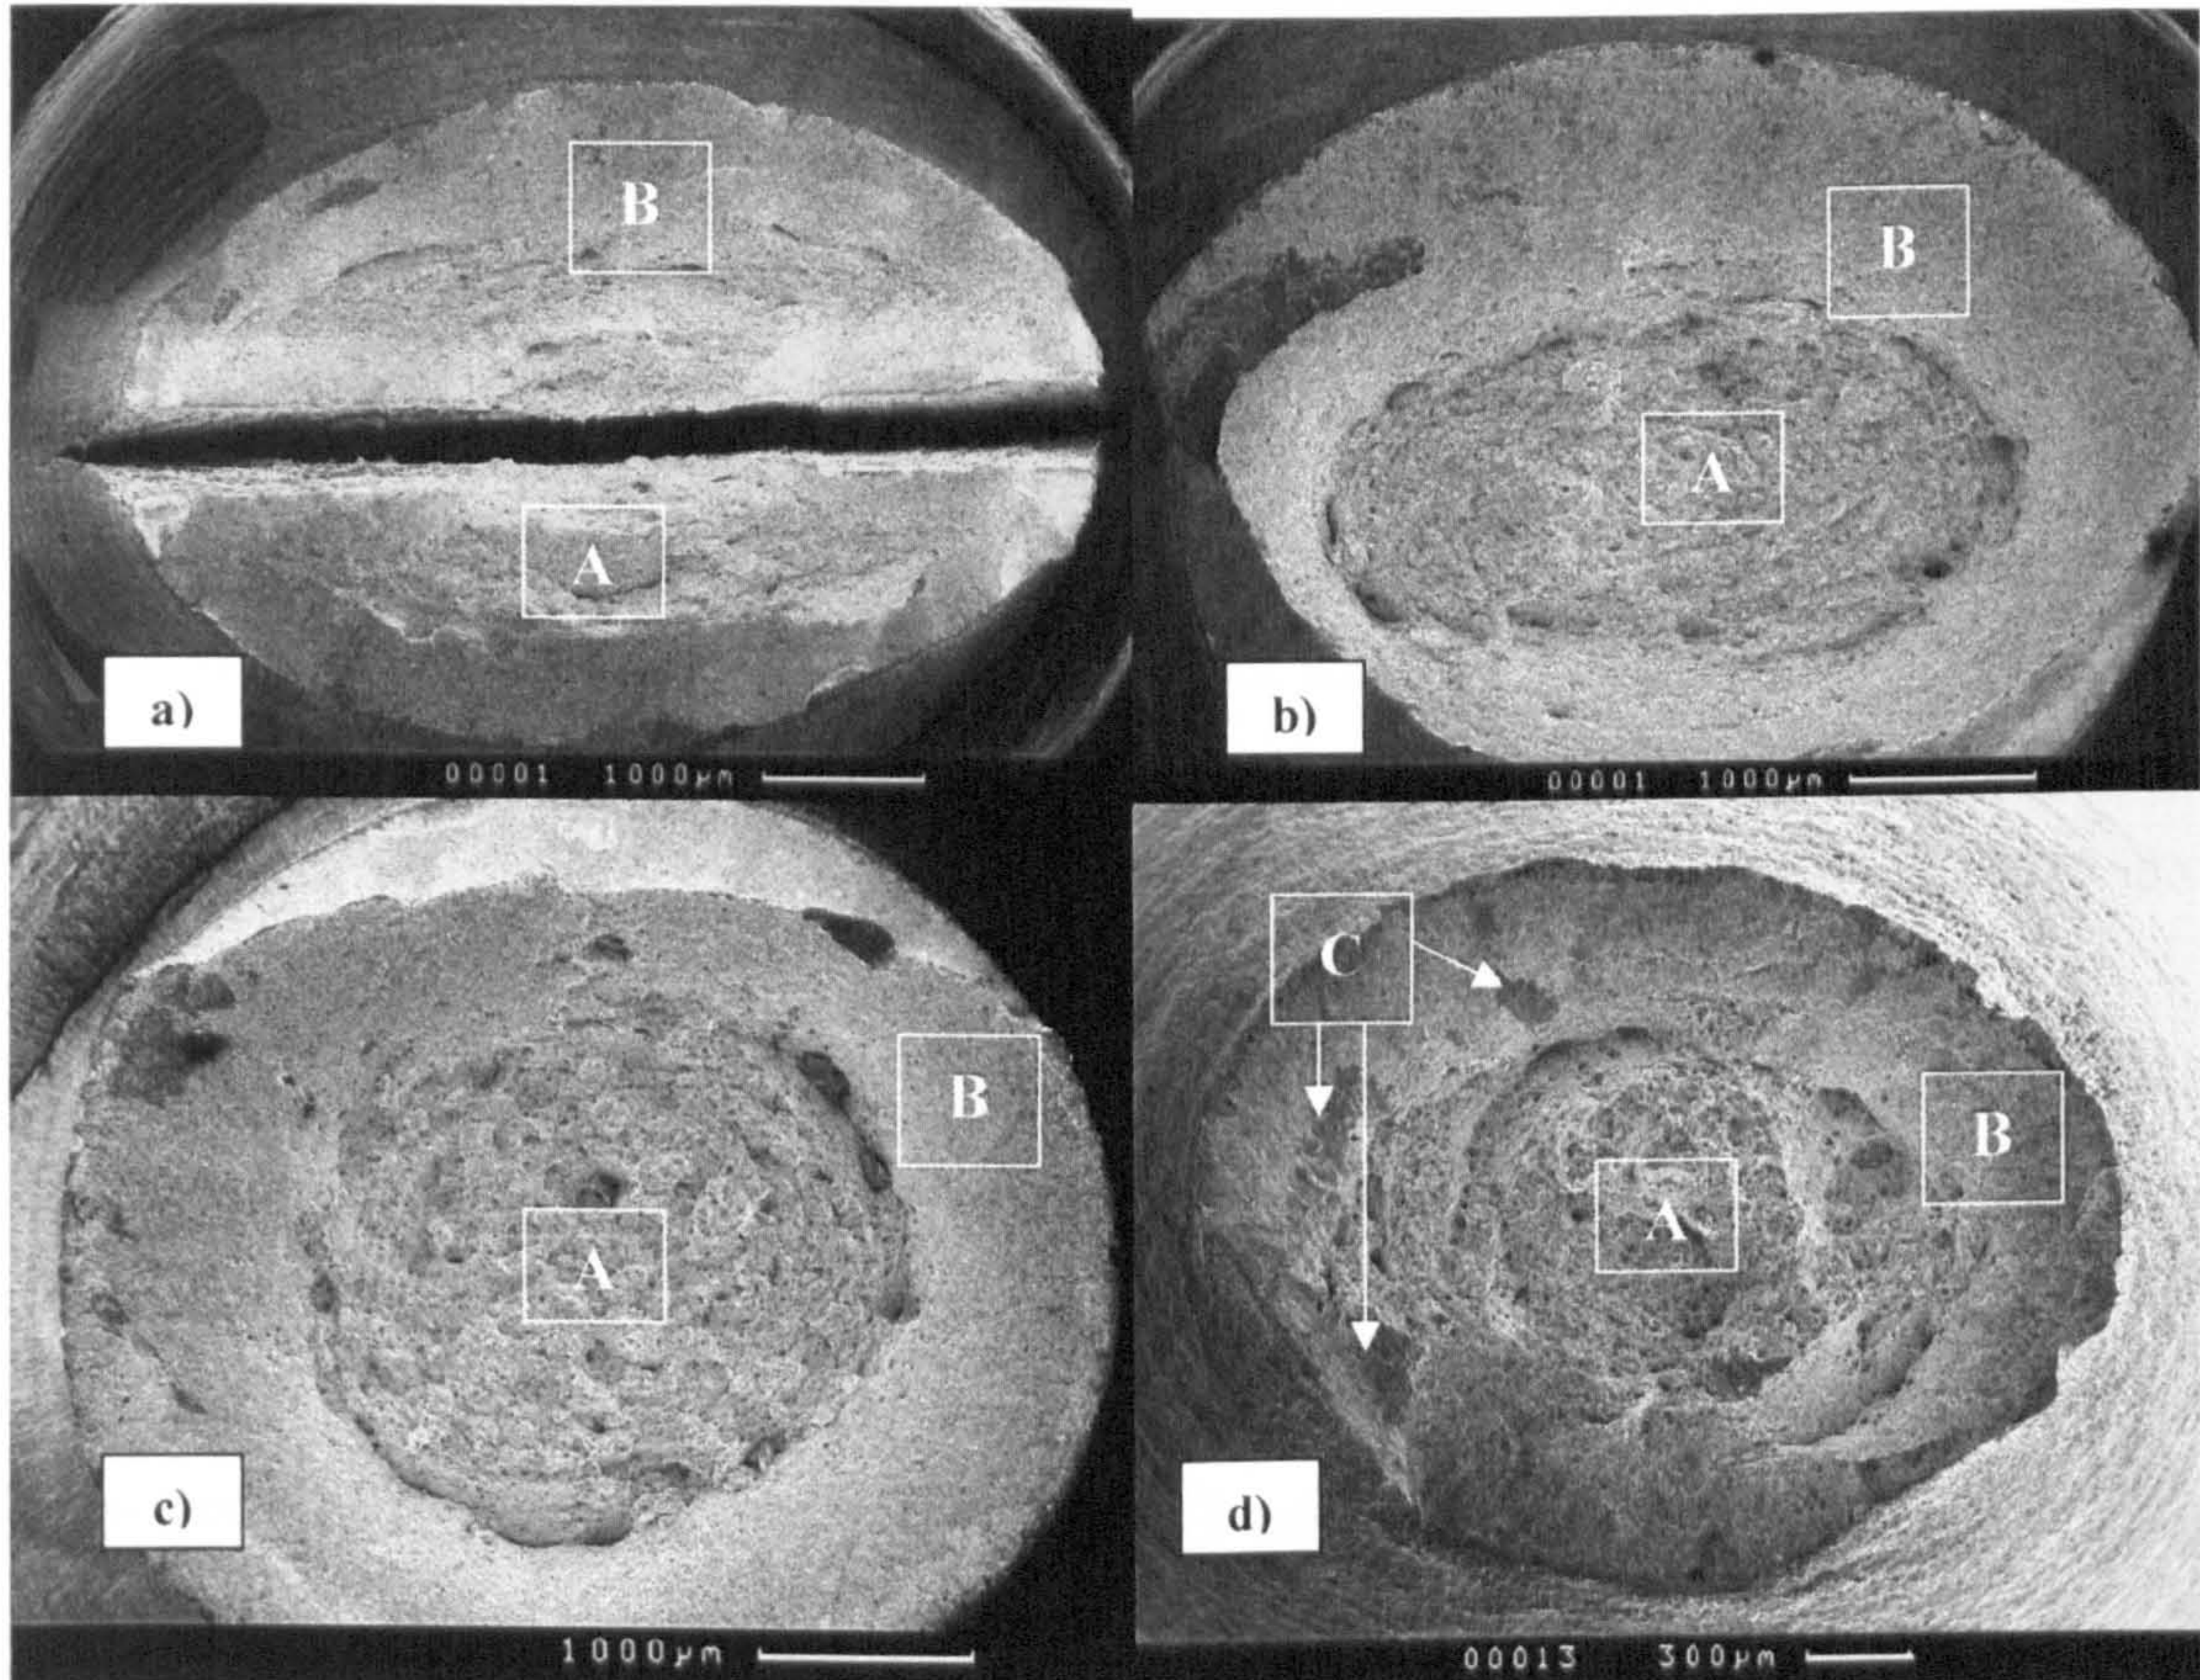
Macroscopic fracture surfaces of tensile specimens in: a) L direction (S-T fracture plane), b) T direction (S-L fracture plane), c) 45 direction (S-LT fracture plane) and d) S direction (L-T fracture plane).
